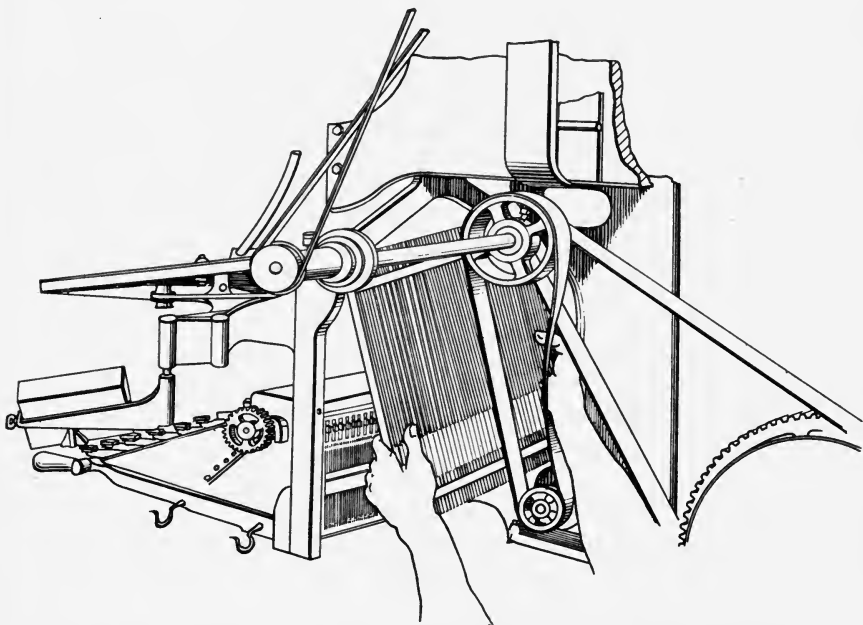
Method of removing the key rod tilting frame on the Mixer machine, should it be necessary to replace a key rod overmotion spring.
